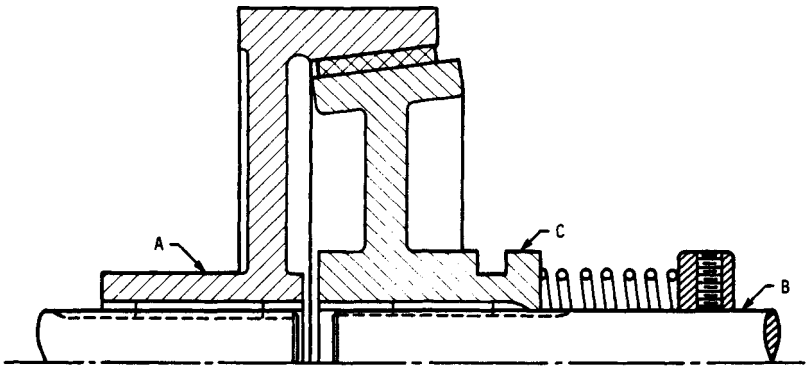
Schematic drawing of a cone clutch; A, driving member; B, driven shaft; C, movable sleeve.
